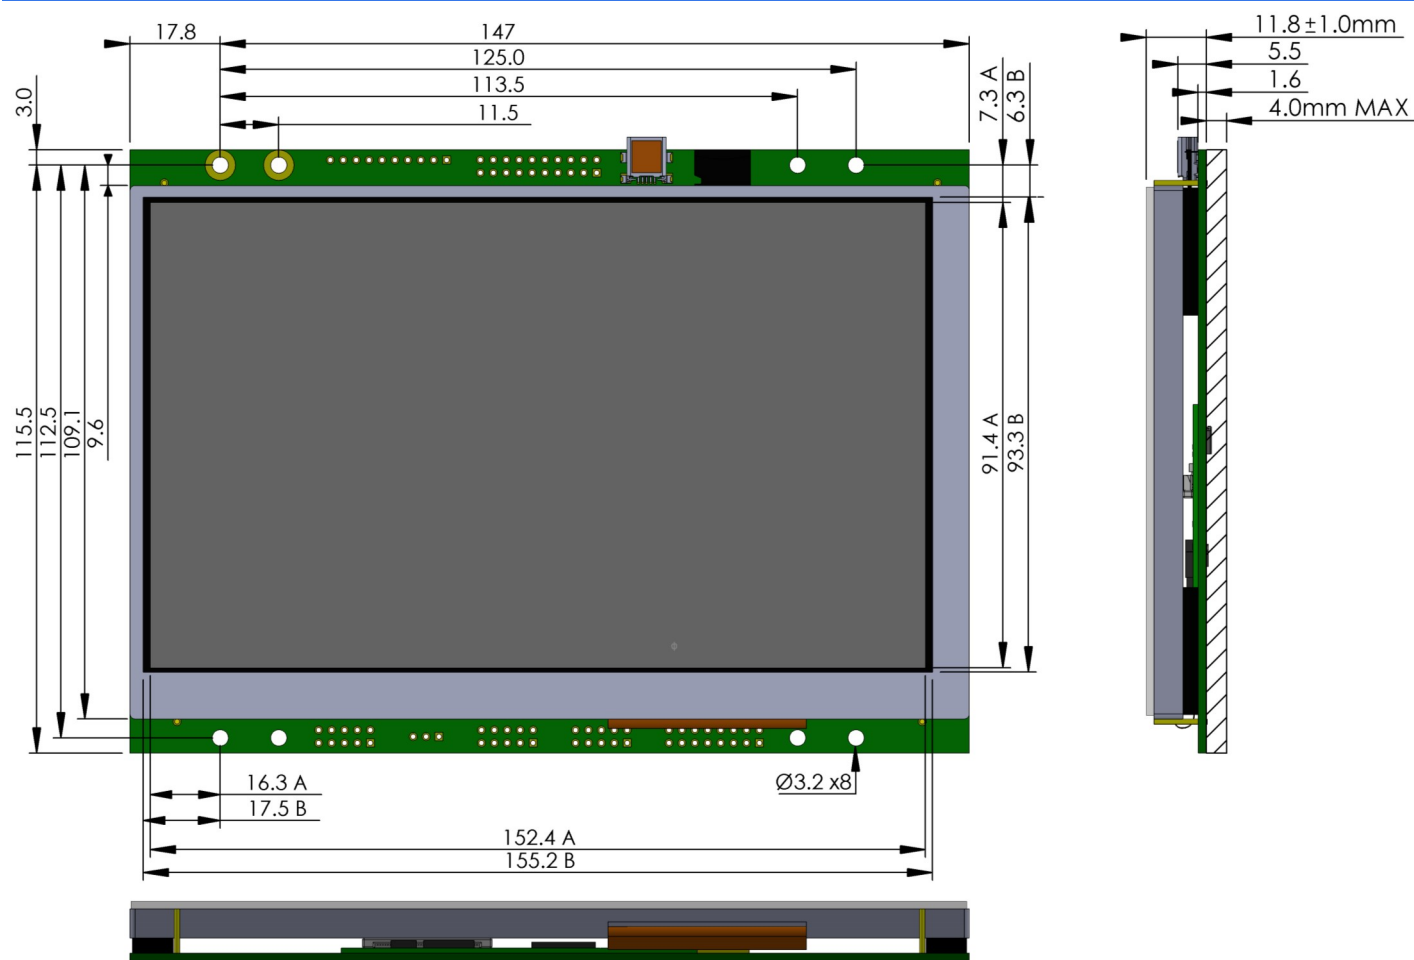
TW800x480C-K619SE4R2MU Mechanical drawing. Reference dimensions only.
